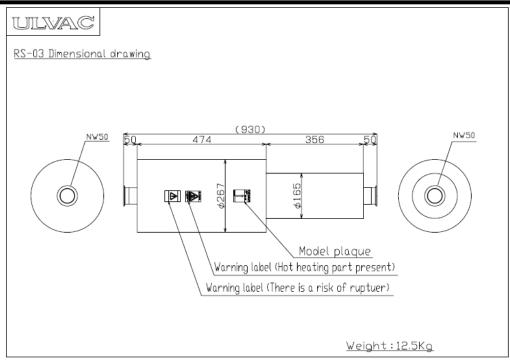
RS-03 Dimensional drawing (LR421, LR421-T, LR3601, LR3601-R)
